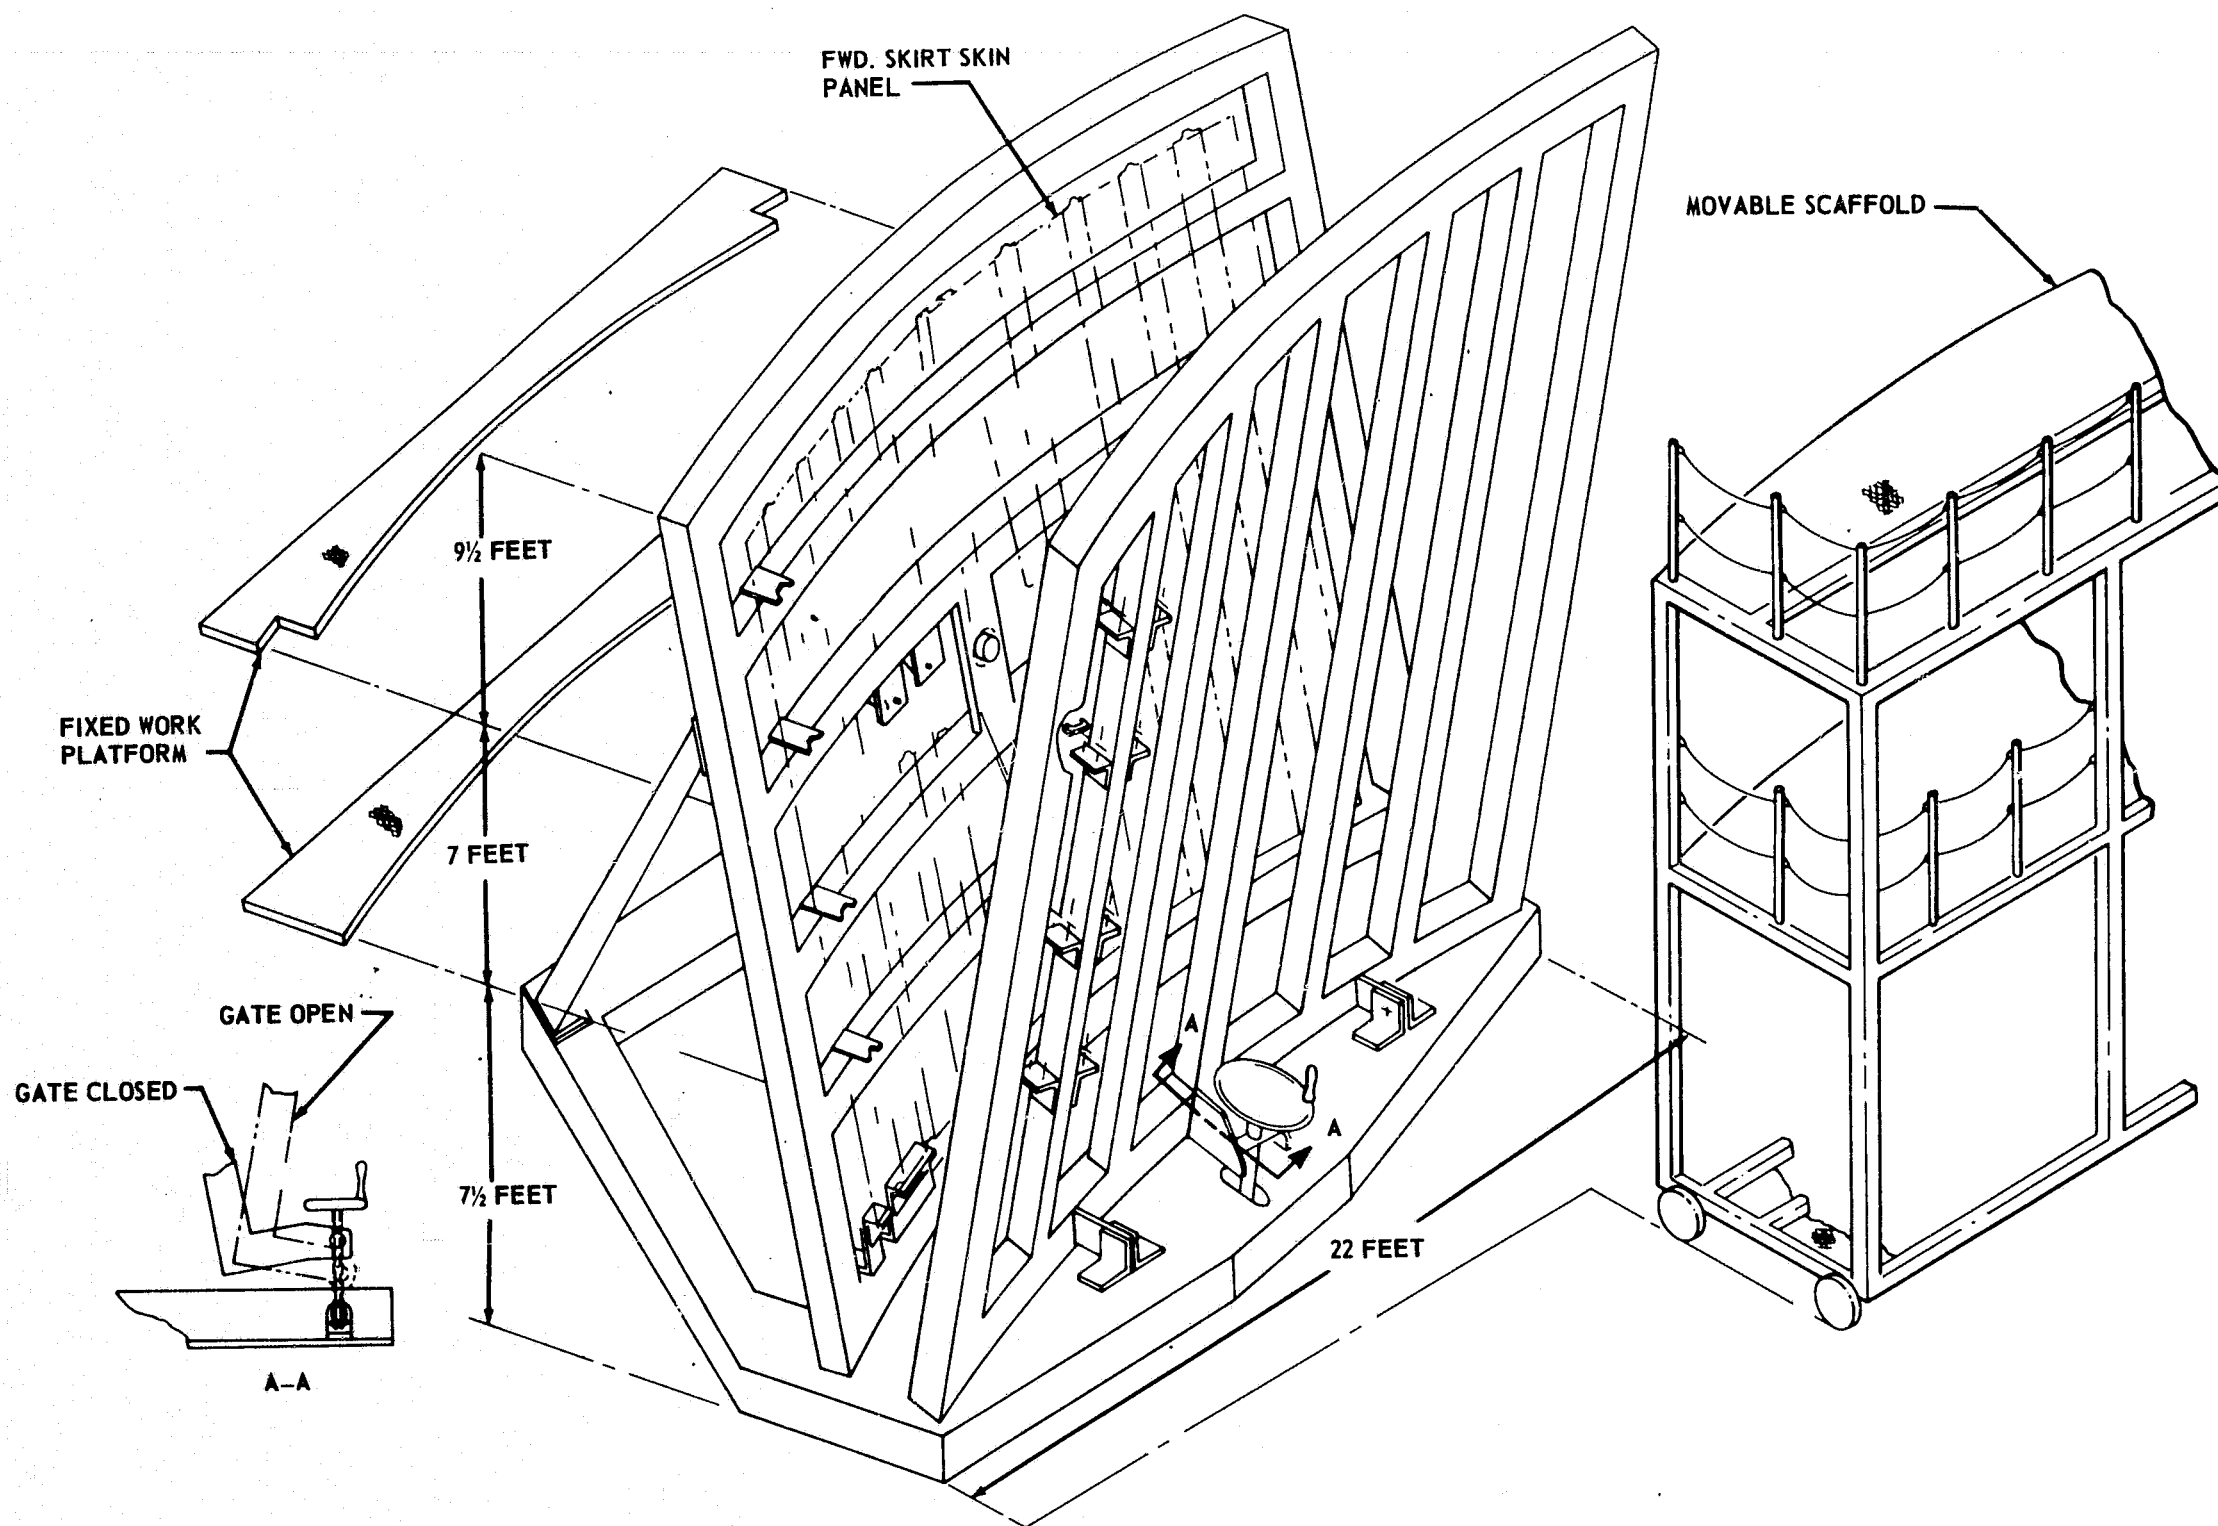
SKIN PANEL SUBASSEMBLY FIXTURE (AMLLV)
